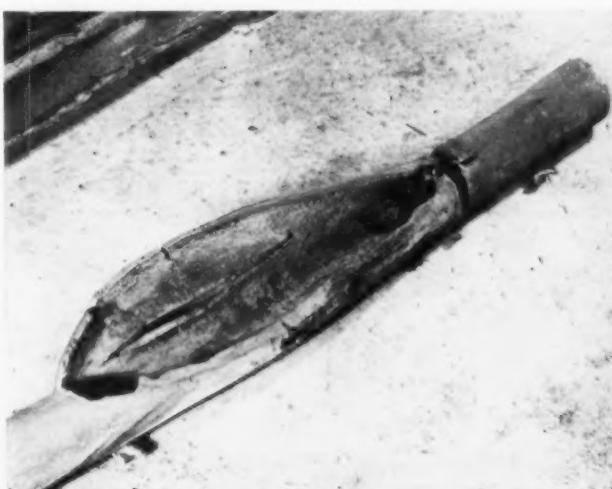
South wall tube at Firestone in which rupture took place 3 to 4 ft above the floor of the furnace
